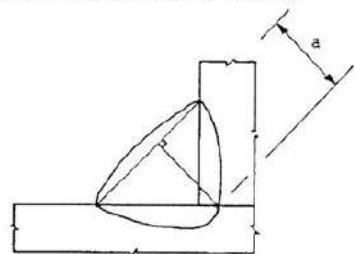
Throat thickness of a deep penetration fillet weld
